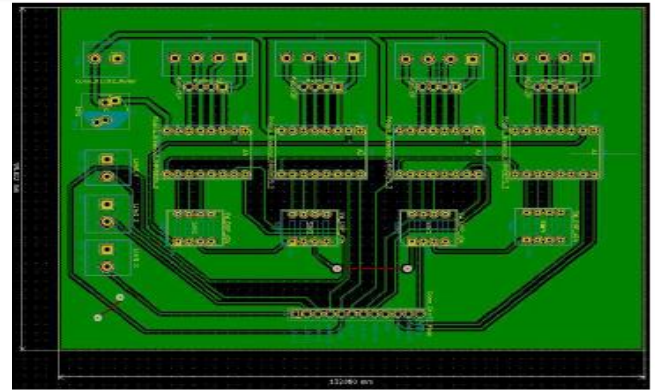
Final PCB layout after routing all the traces and placing the components in their desired position
